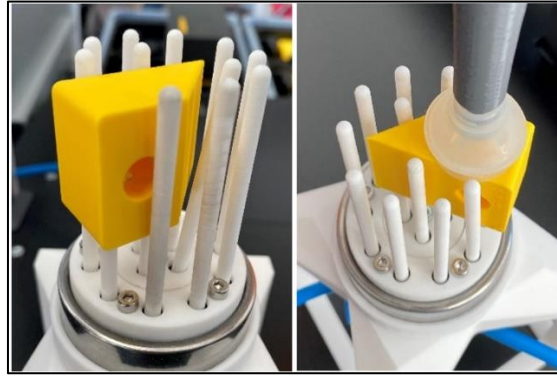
Irregular part inside the fixture with extended pins. Right: Part is placed by a robot inside the fixture, and it closes around it
